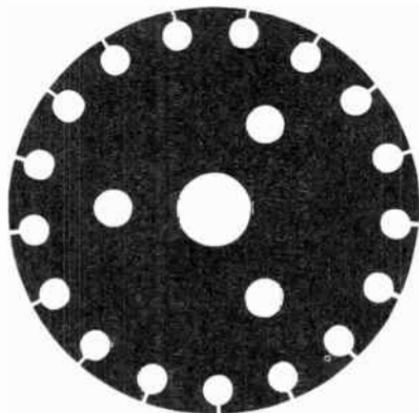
A rotor punching for use in the rotor of an induction motor.
